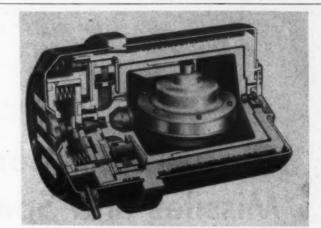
CUTAWAY VIEW of gas bearing gyroscope shows spin-motor supported in a cylindrical gimbal supported by a viscous fluid to achieve near friction-free support.
